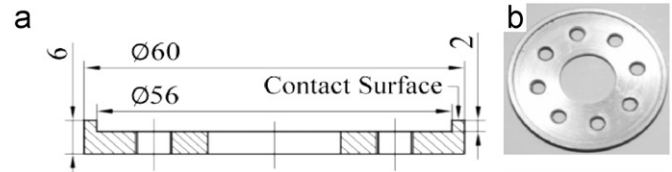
(a) Test specimen with the main dimensions (mm) and (b) photograph of the specimen.
